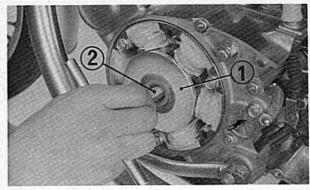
(1) Rotor (2) Generator rotor puller
